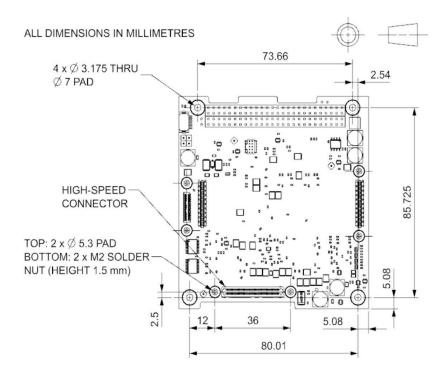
CE and High-Speed Connector Mounting Hole Details
